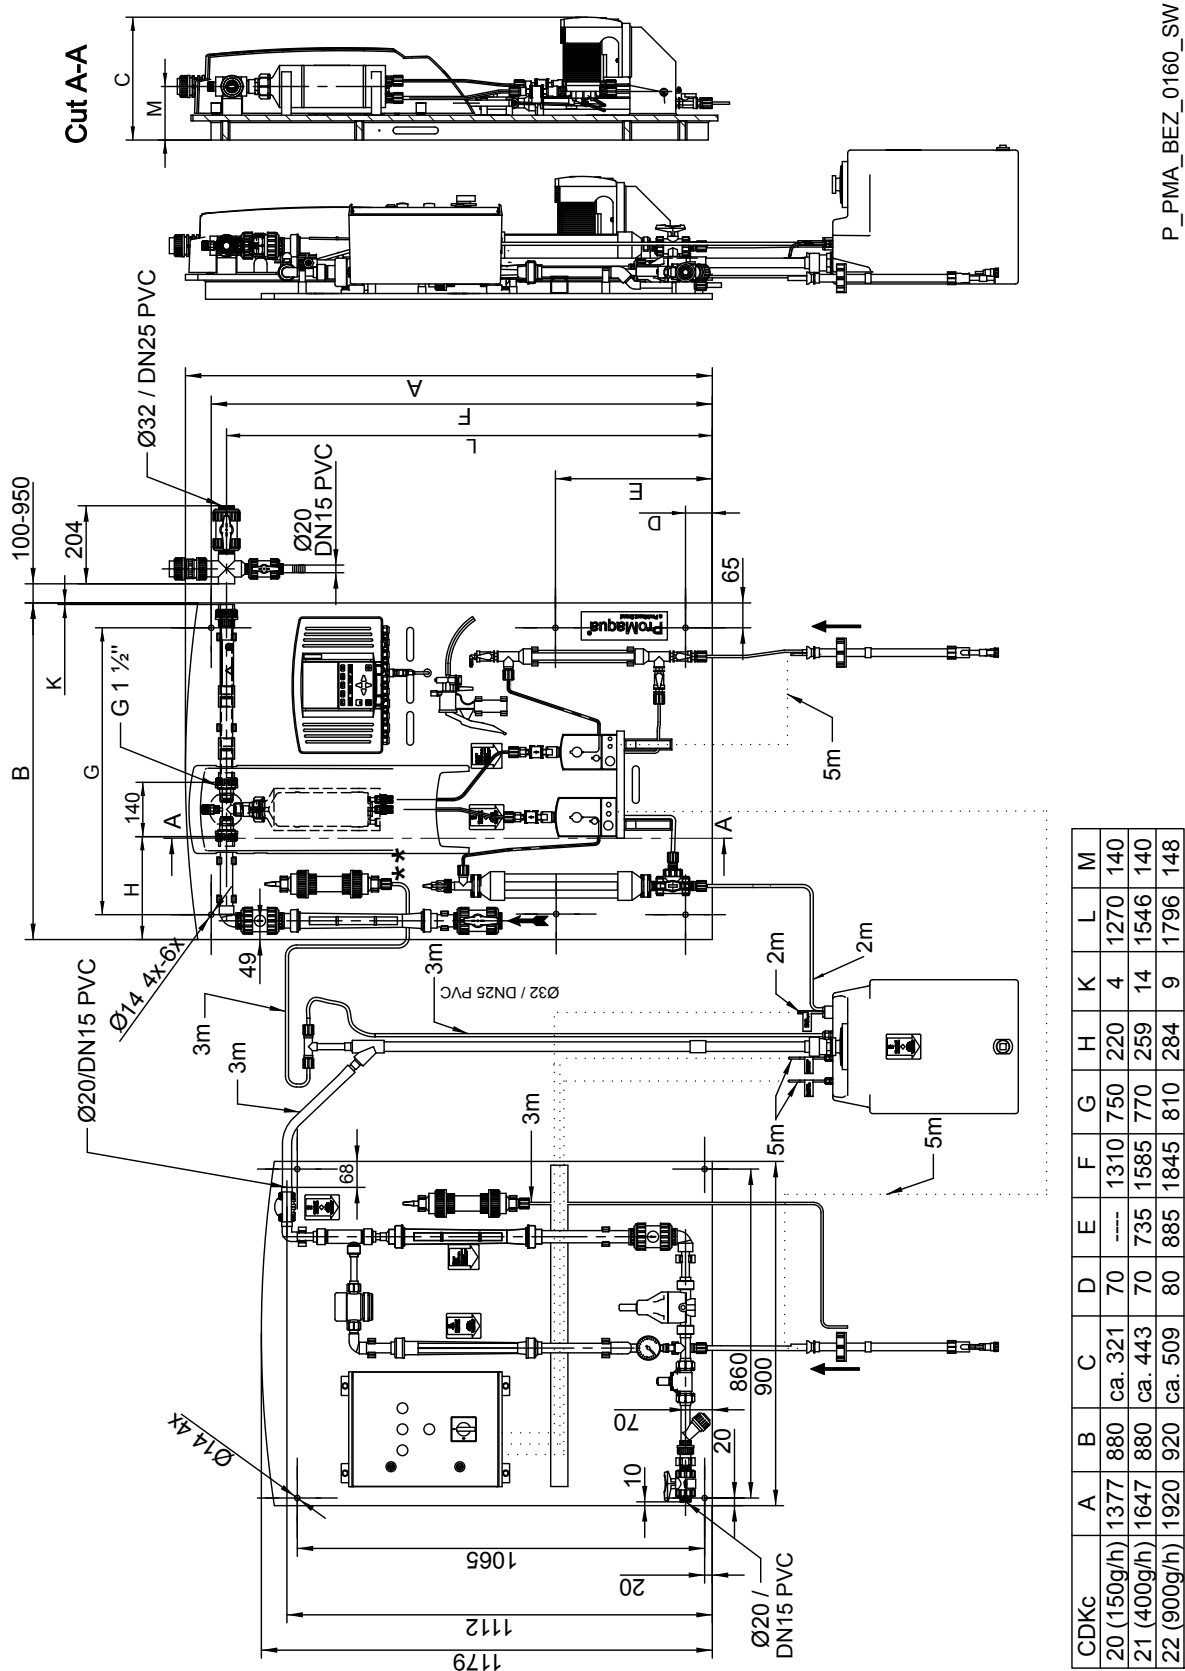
Dimension sheet CDKc 150 ...900 - dimensions in mm
